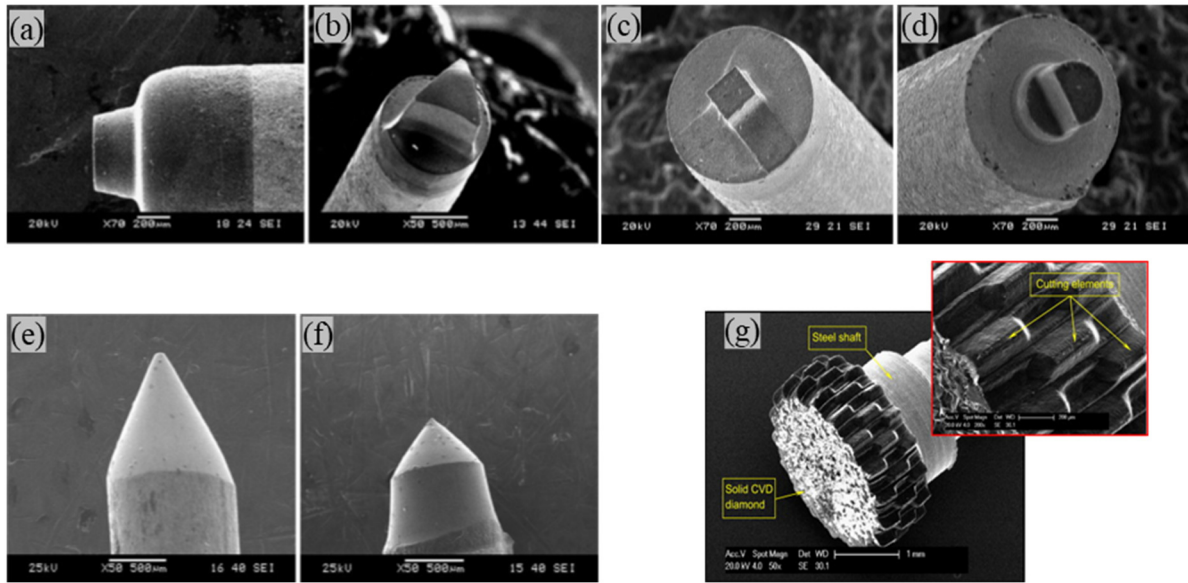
Micro-grinding tools: a: circular tool; b: triangular tool, c: square tool; d: D-shaped tool; e: conical tool of 60°; f: conical tool of 90° (Reprinted by permission from [23]; and g; unused laser ablated solid diamond micro-grinding tool (Reprinted with permission from [24]).
